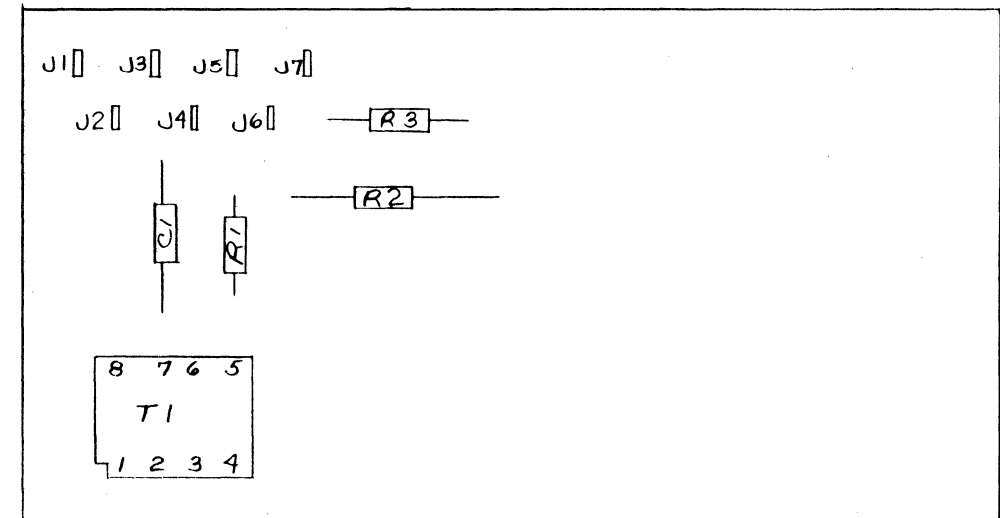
Oscillator Board (26 vdc) Parts Location (837244)
